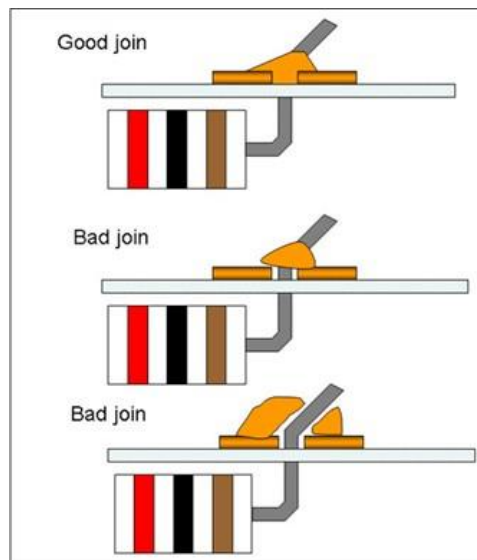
The solder in a good joint will be shaped like a cone, with solid contact between the solder and all surfaces to be joined.
